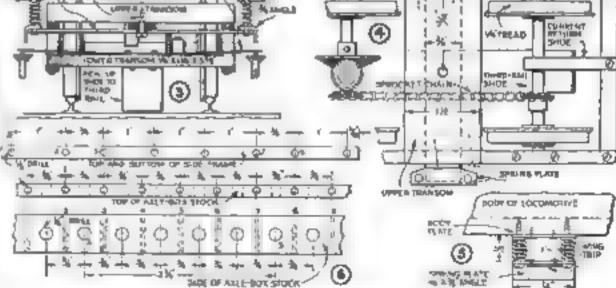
Side elevation of the motor-track. Fig. 2—Hevel genring aptrocket and section through the journal bea. Fig. 3- End view. Fig. 4-Part plan view Fig. 1- Detail of spring plate and springs. Fig. 6-Method of byring out brees boxes and side frames
